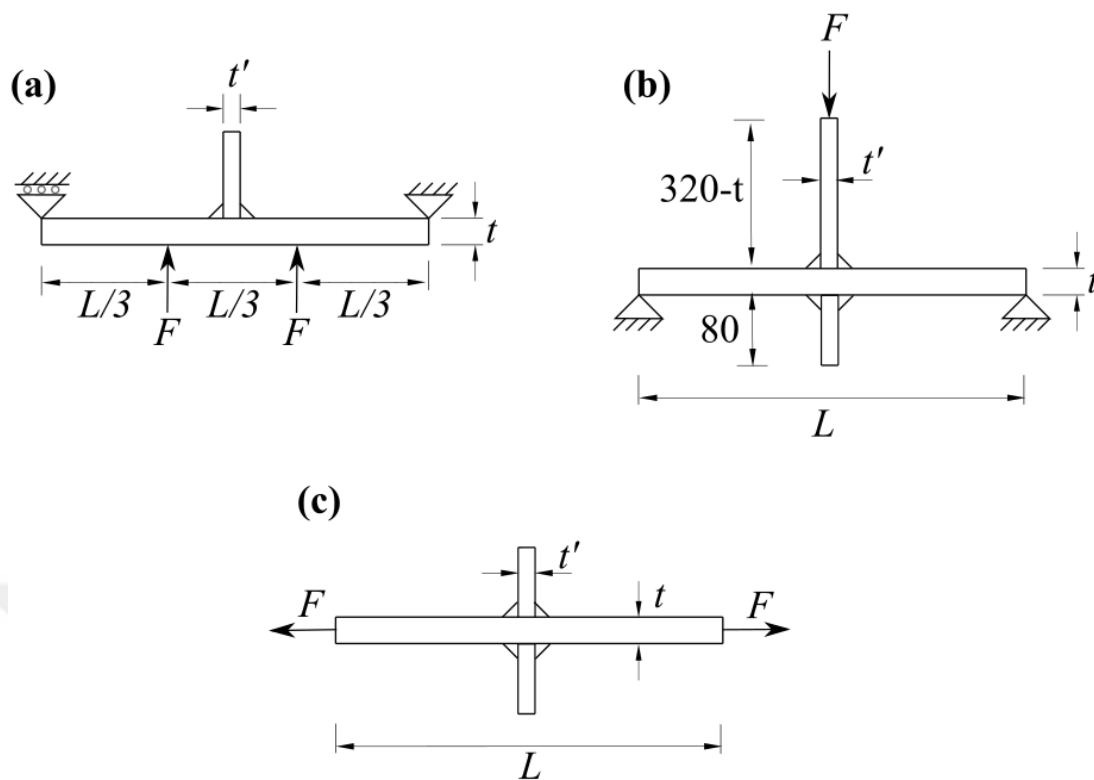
Geometric configurations, loading and support conditions under (a) 4-point bending [67]; (b) 3-point bending [68]; and (c) axial loading [16], [69]
